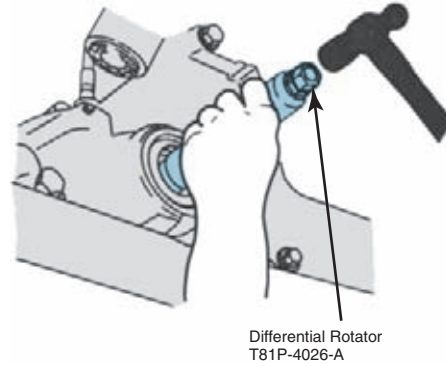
After the right-side CV joint has been removed, a special tool should be used to drive the left-side inboard CV joint from this transaxle; the tool is then left in place to hold the differential pinion gears in alignment. (Courtesy of Ford Motor Company)
